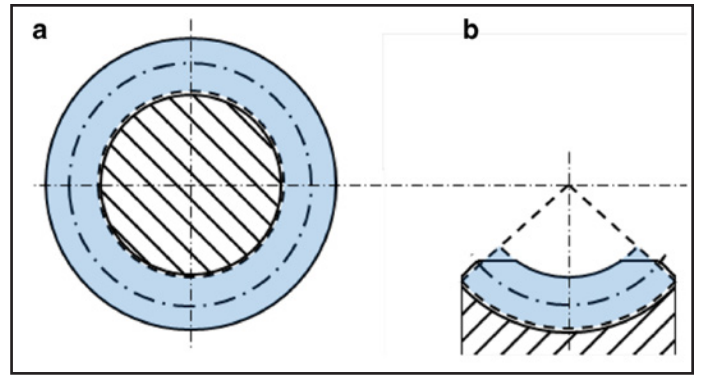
Assumed active tooth surface of the worm shaft (a) and the worm wheel (b).
